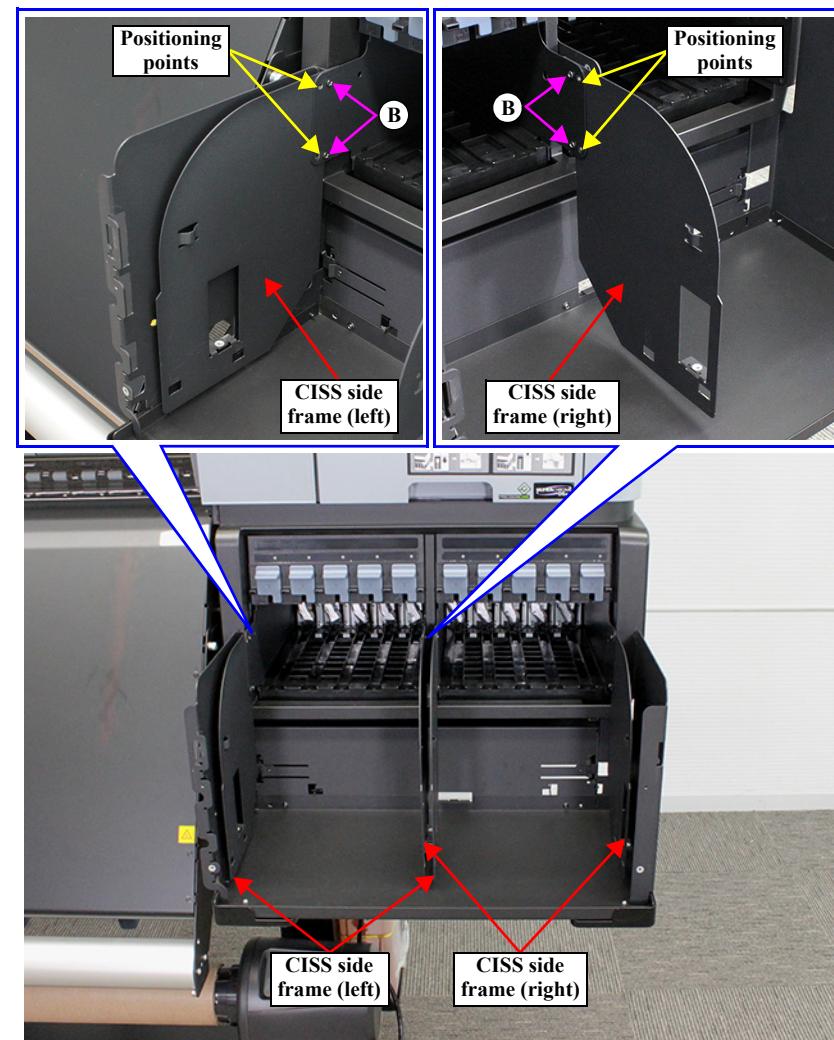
Removing the CISS side frame (left)/ CISS side frame (right)
